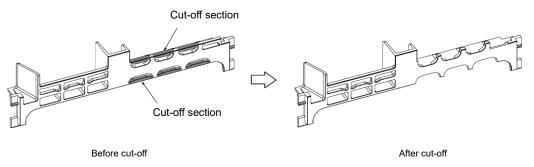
Wiring guide (for FRN0075G2S-2G)
